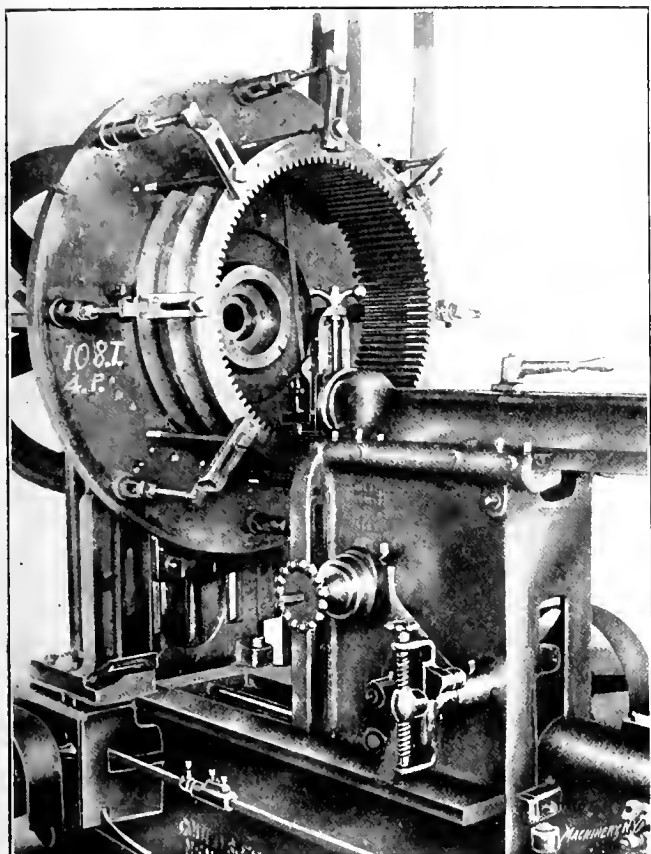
A Hybrid Machine, at Work on a Wide-faced Internal Gear.
